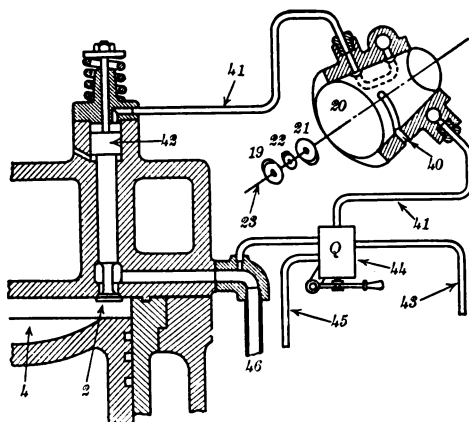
PNEUMATIC CONTROL OF STARTING-AIR VALVE
